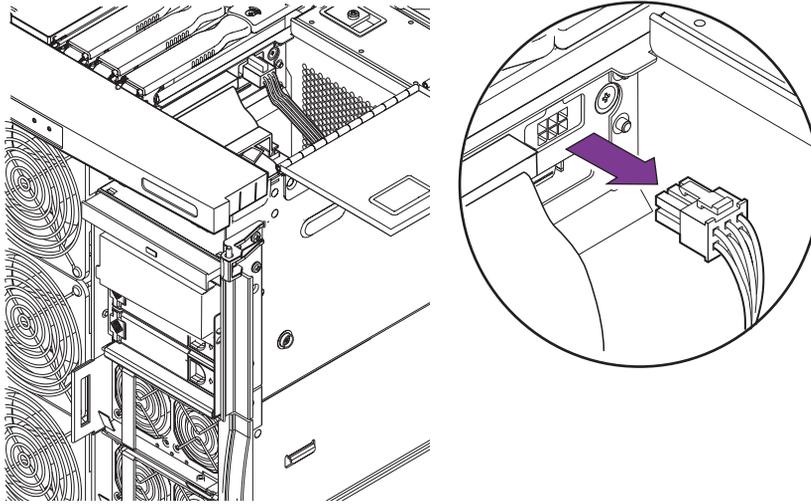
Removing Cables from IB_SSC Assembly to the Media Bay
